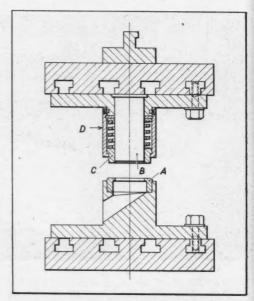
Sectional elevation showing the punch and die assemblies of a Gold Star type B unit
